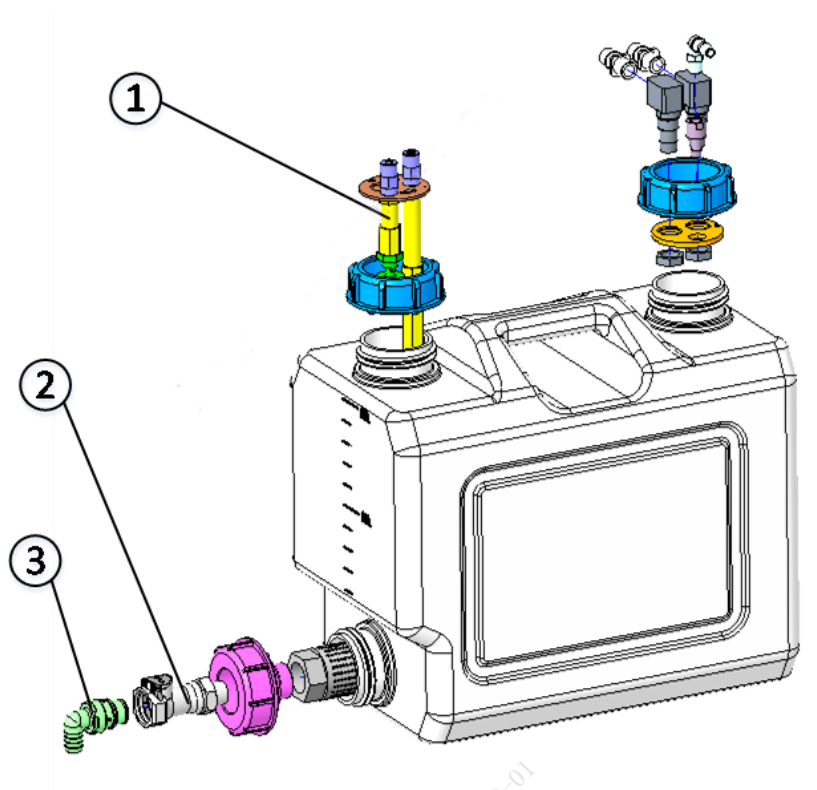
Exploded view of Water tank assembly(Before EBJ650)
